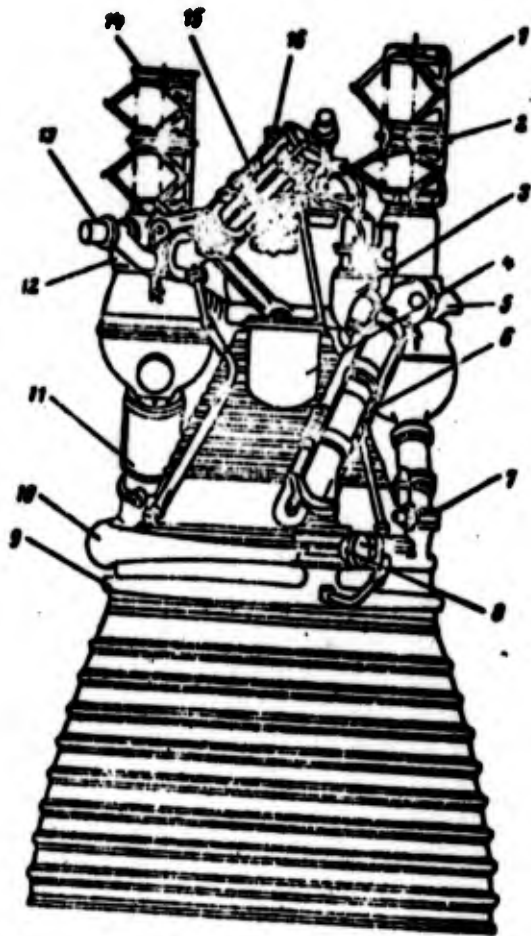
Engine J-2: 1 - feed main fuel line; 2 - main oxidizer valve; 3 - gas generator; 4 - electrical control unit; 5 - fuel pump; 6 - main fuel line after the pump; 7 - oxidizer bypass valve of turbine; 8 - main fuel valve; 9 - fuel collector; 10 - exhaust collector; 11 - heat exchangers; 12 - oxidizer pump; 13 - throttle to change ratio of fuel components; 14 - feed main oxidizer line; 15 - main oxidizer line after the pump; 16 - Cardan subassembly suspension.
